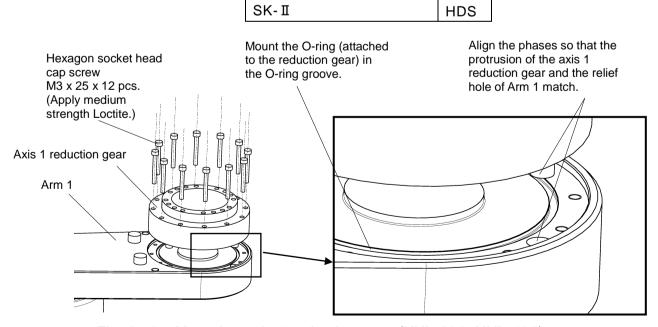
Mounting axis 1 reduction gear (KHL-300, KHL-400)
